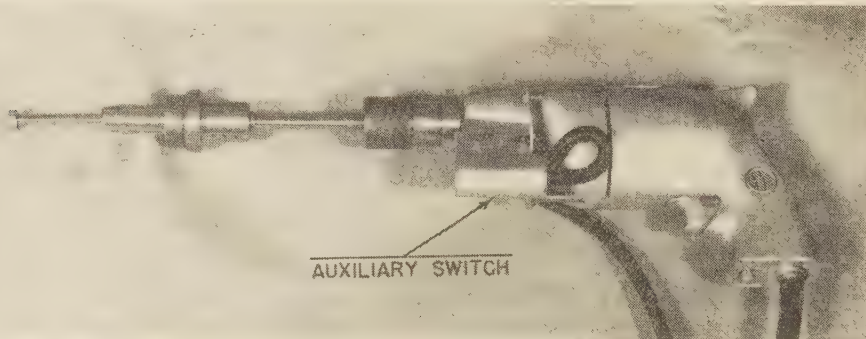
EXPANDING TOOL WITH AUXILIARY SWITCH
